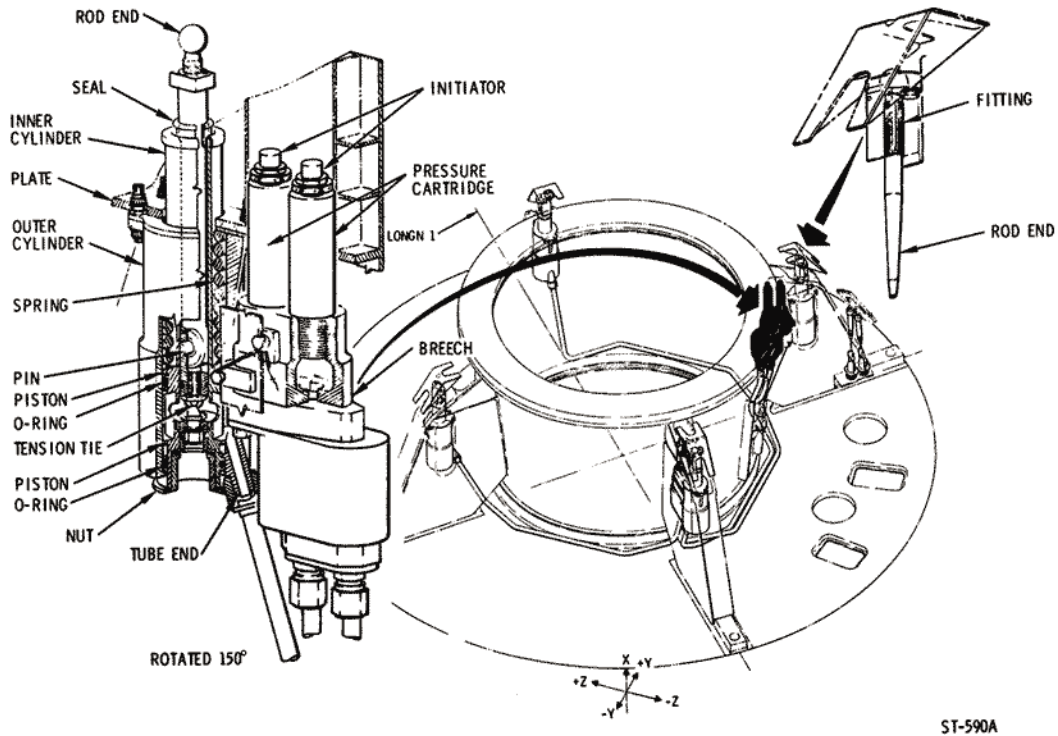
Forward Heat Shield Attachment and Thruster Assembly
